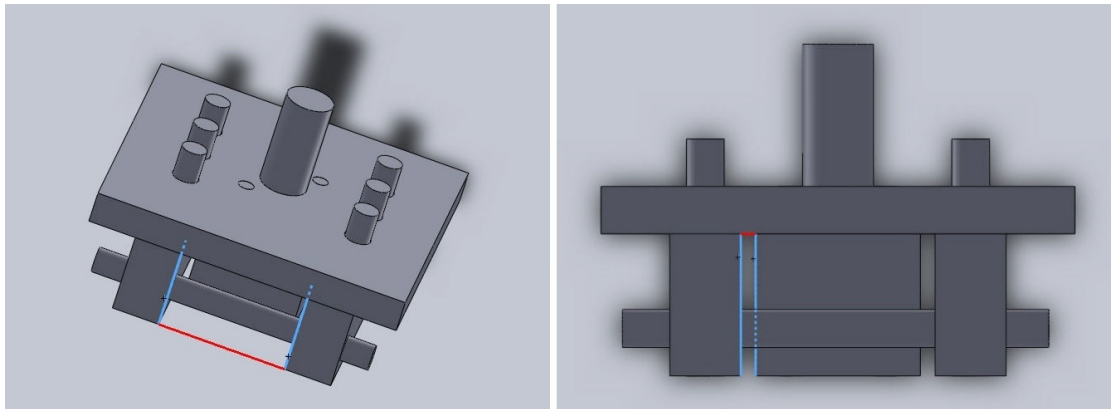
Solid drawing of the fixture that attaches samples to the wedge
